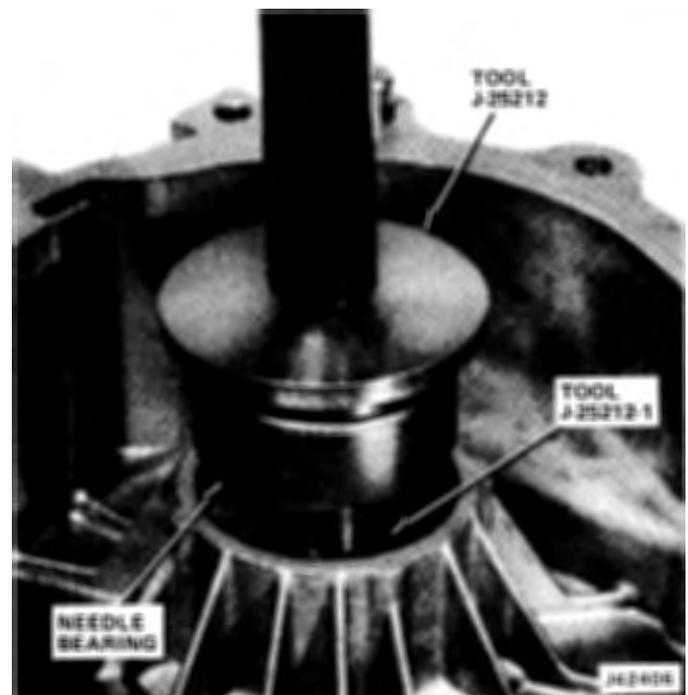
Installing Drive Sprocket Front Needle Bearing
